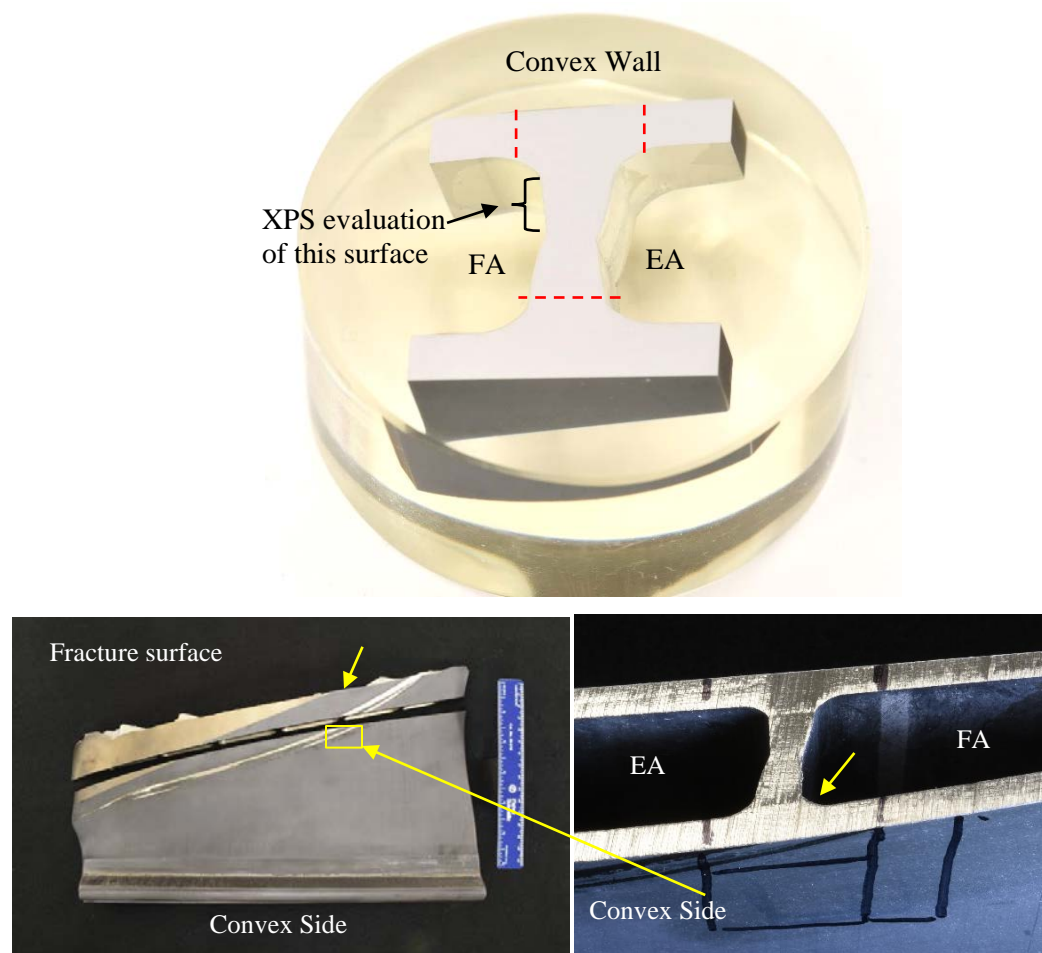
XPS was completed at the location shown above, on a rib in cavity FA, approximately 1 inch below the fracture surface.
